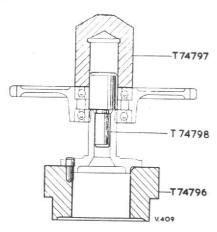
Pressing the distance piece and second ball bearing into the idler gear
